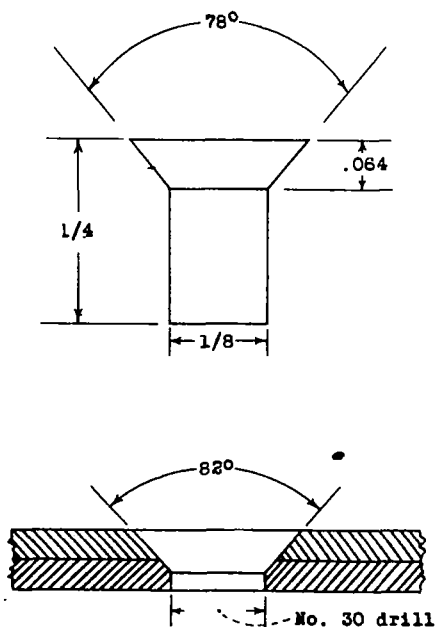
Dimensions of machine-countersunk rivet and angle of countersink used in riveting method C for 1/8-in. rivet.
